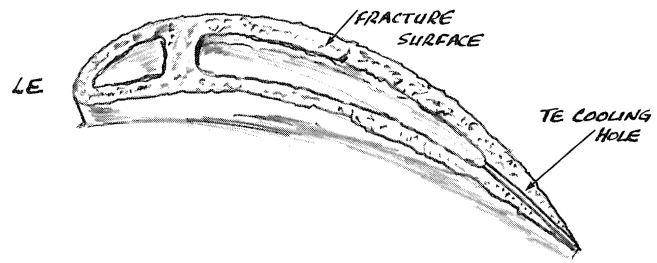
Sketch of Fracture Surface Bisecting Bottom of TE Cooling Hole.
